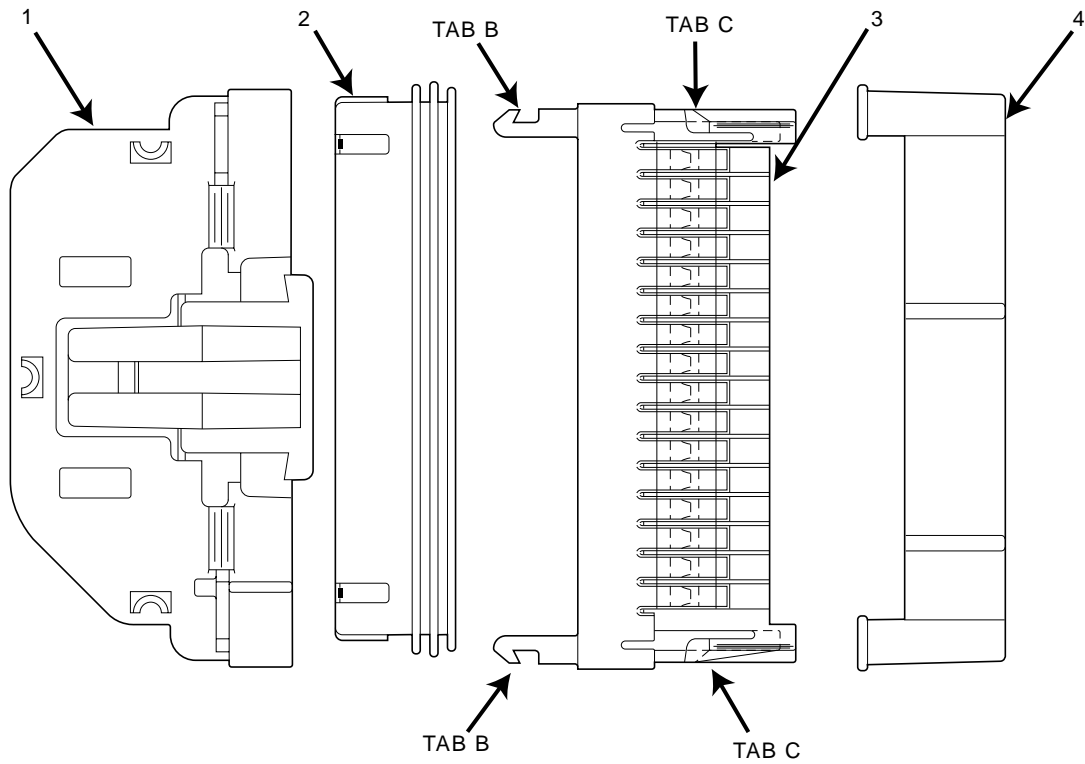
FIGURE A - EXPLODED VIEW OF CONNECTOR ASSEMBLY
